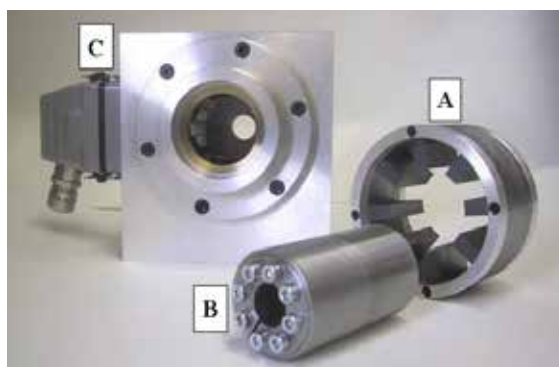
Experimental radial AMB - initial design: A - stator, B - rotor, C - housing
